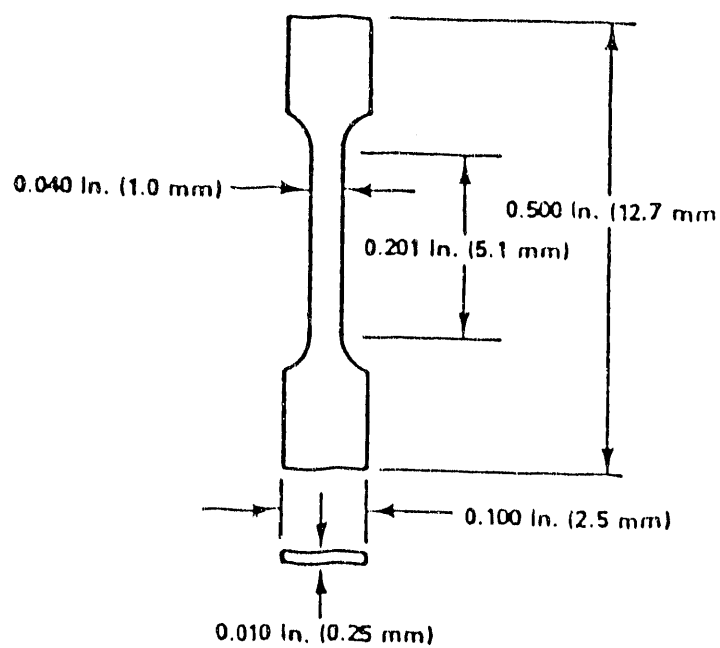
Dimensions of the miniature tensile specimens irradiated in FFTF.
